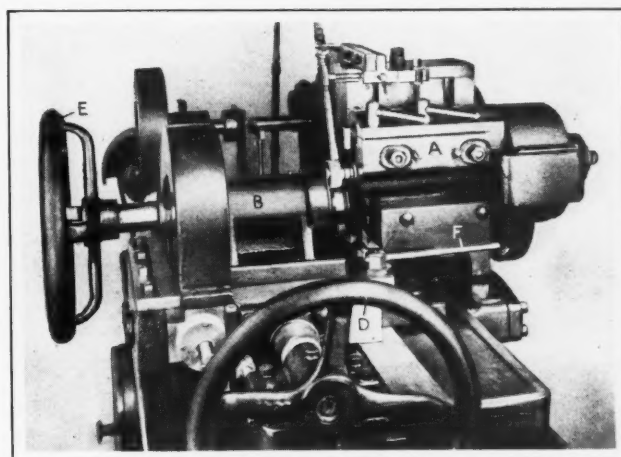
Close-up View Showing Relation between Cam and Cutter
